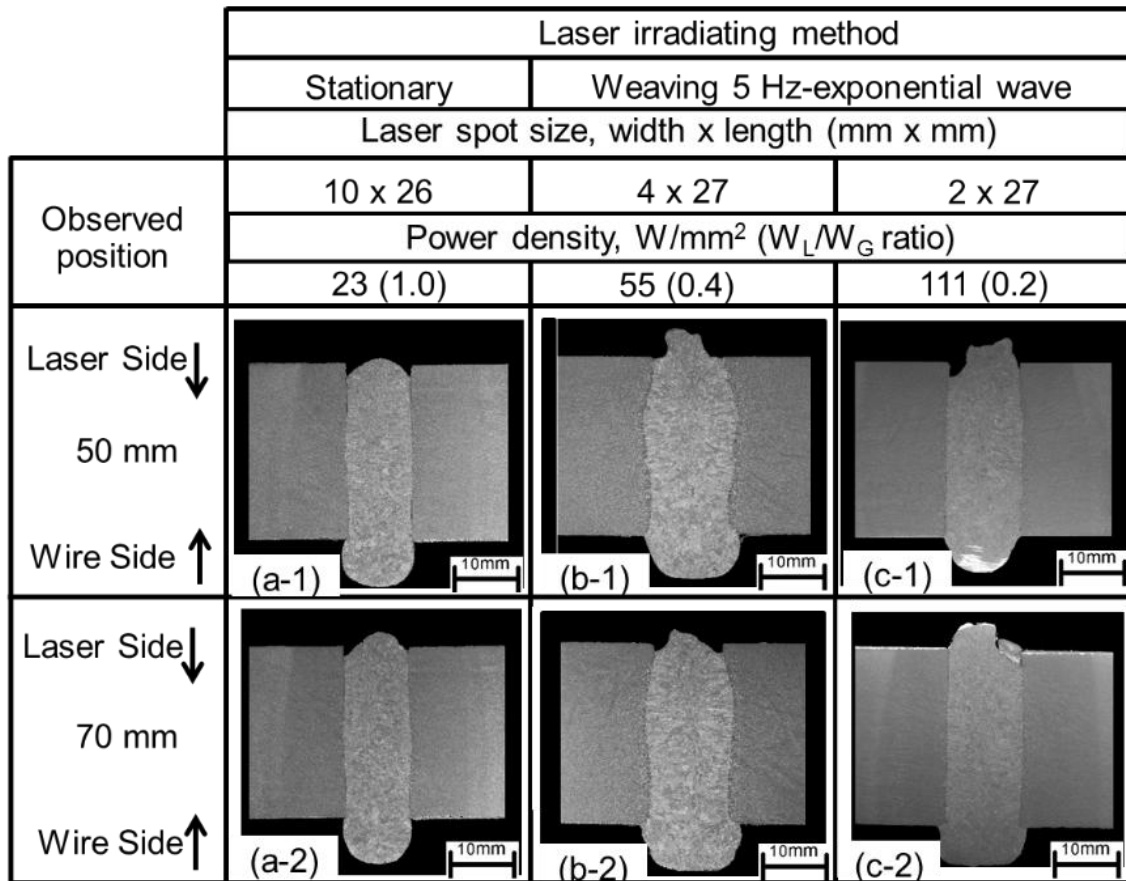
Macro cross section of transverse welding direction cut
